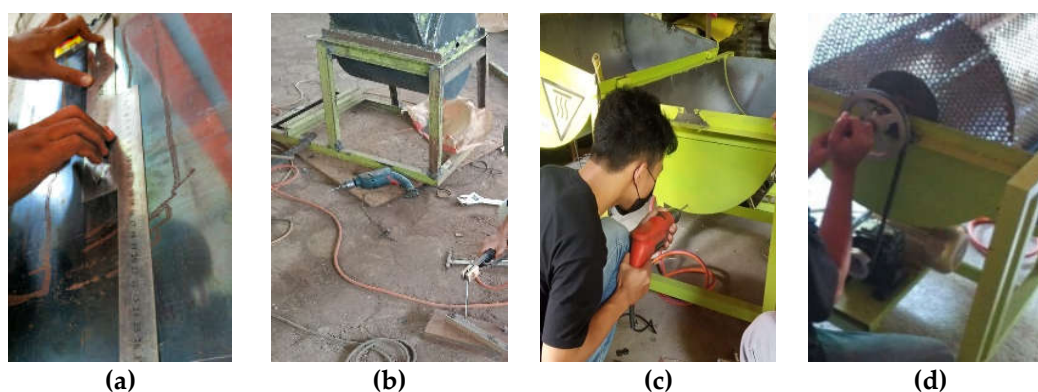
Manufacturing Process of Water Hyacinth Dryer Machine.
